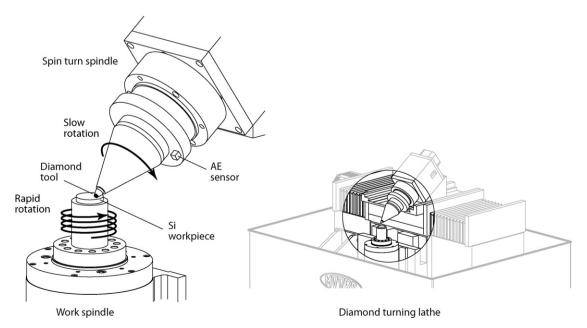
Machine configuration for spin-turning silicon optics. The tool spindle is tilted with respect to the work spindle for an effective rake angle of -45°.
